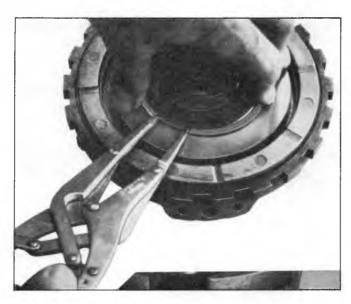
T-Installing Intermediate Clutch Piston Snap Ring
